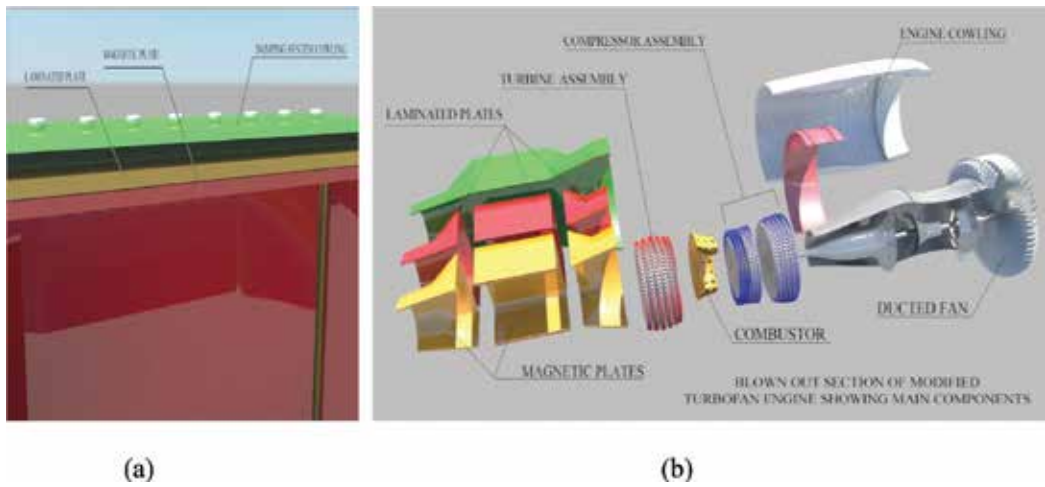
(a) Sectional view through a modified aircraft engine. (b) Blown-out section of modified new jet engine concept showing laminated vibration damping mechanism.
